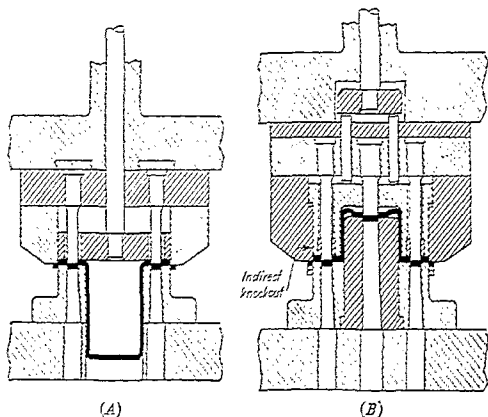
Compound trimming and piercing dies: (A) for piercing holes in flange and trimming flange of deep shell; (B) for piercing holes in flange and bottom and trimming flange of shallow shell.
